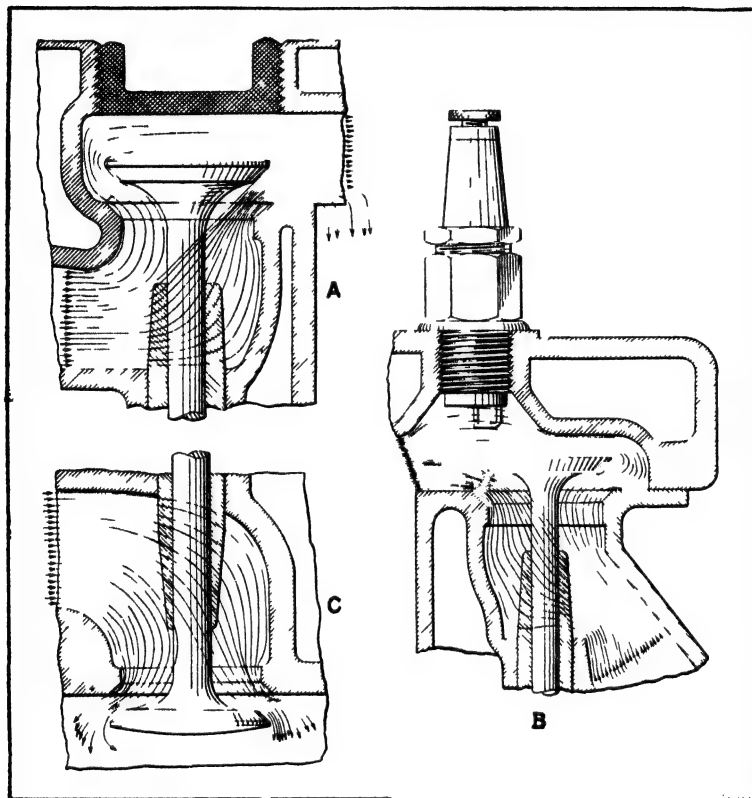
Diagrams Showing How Gas Enters Cylinder Through Varying Valve Types. A—"Tee" Head Cylinder. B—L Head Cylinder. C—Overhead Valve.
